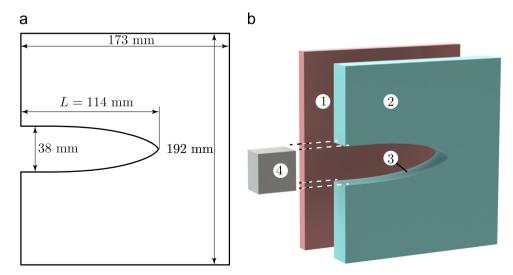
(a) Experimental core and exploded view of the assembly. The core thickness is 25.4 mm for the aluminum and polycarbonate samples. For the PMMA samples, this thickness is 6.3 mm. (b) Exploded specimen assembly with (1) transparent window (only one is depicted for clarity), (2) core, (3) water-filled convergent section, and (4) blocker placed at the entrance of the cavity to serve as impact site and to prevent water from leaking out.
